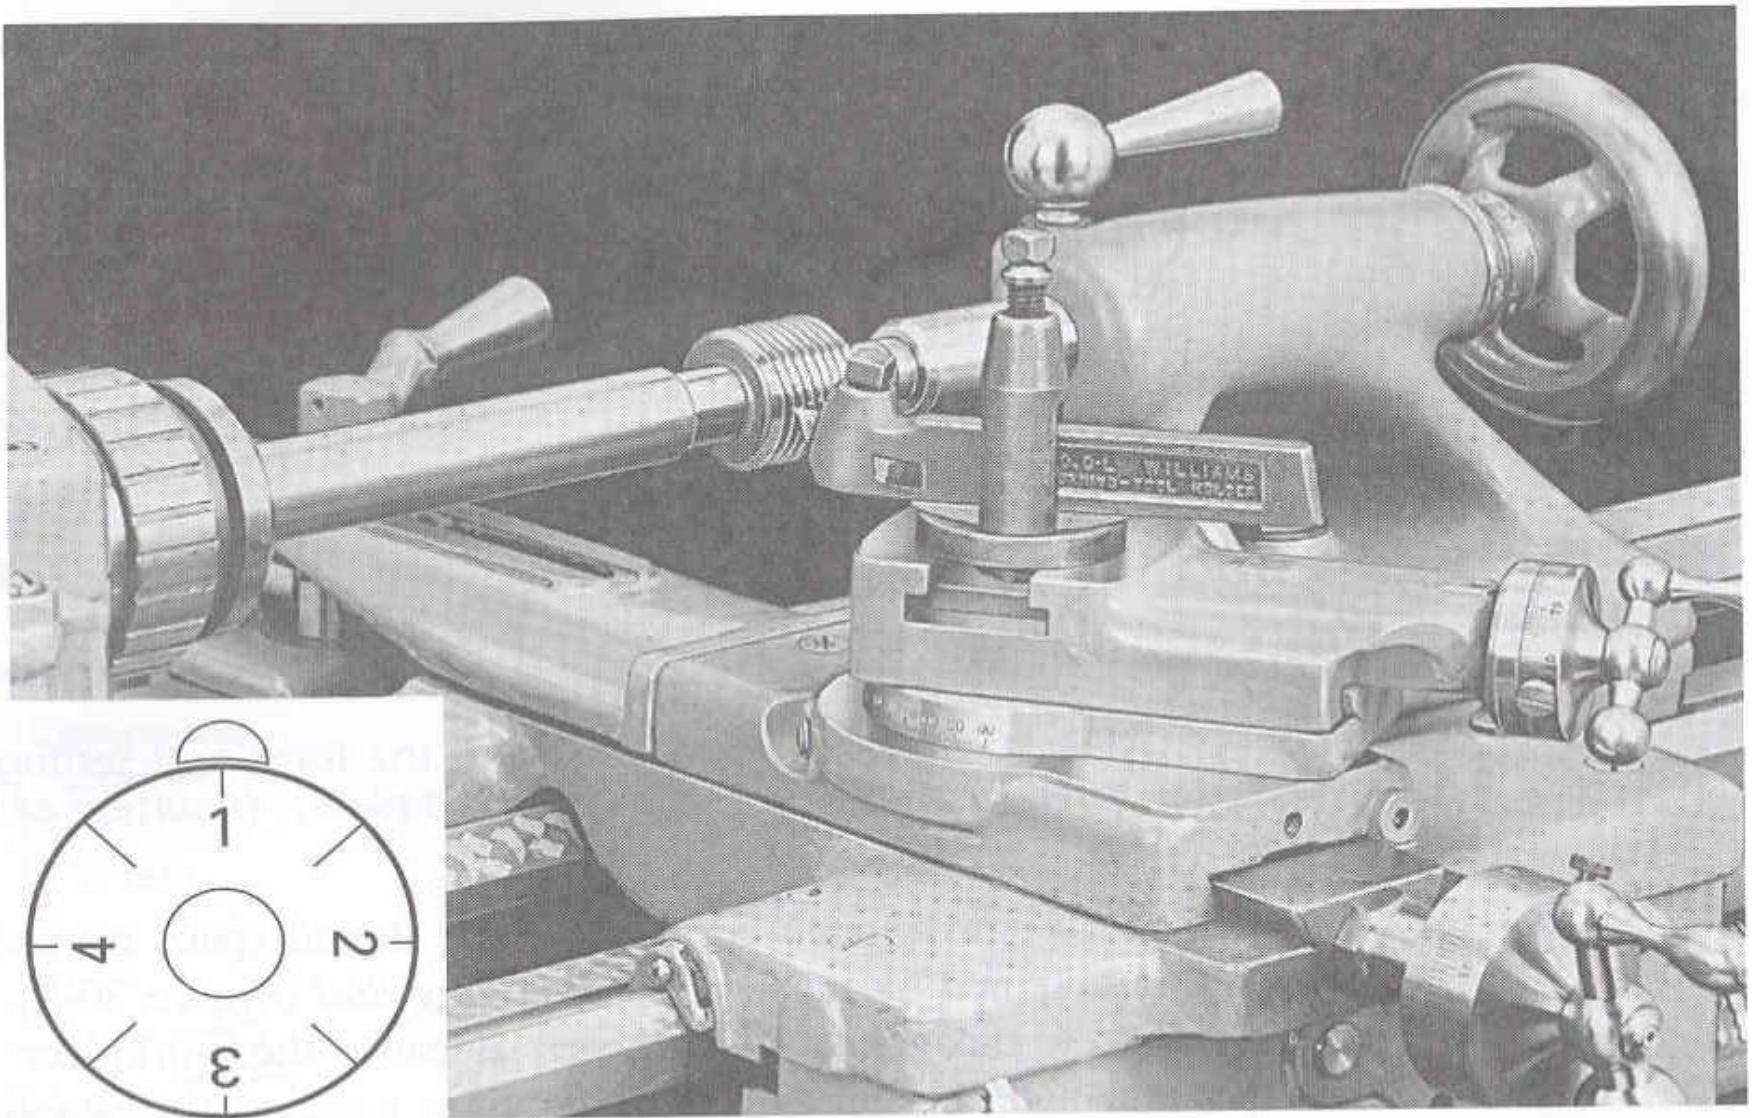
Cutting a screw thread on a lathe, showing the method of supporting the work and the relationship of the tool to the work. Inset shows face of threading dial. (Courtesy of South Bend Lathe.)
